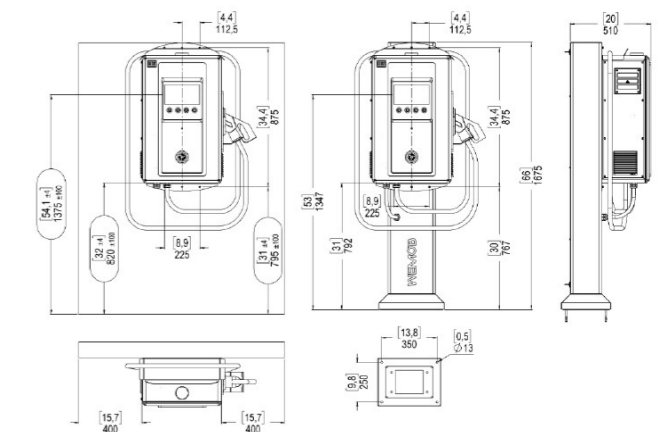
WEMOB-STATION dimensions in inches ["] and millimeters [mm]
